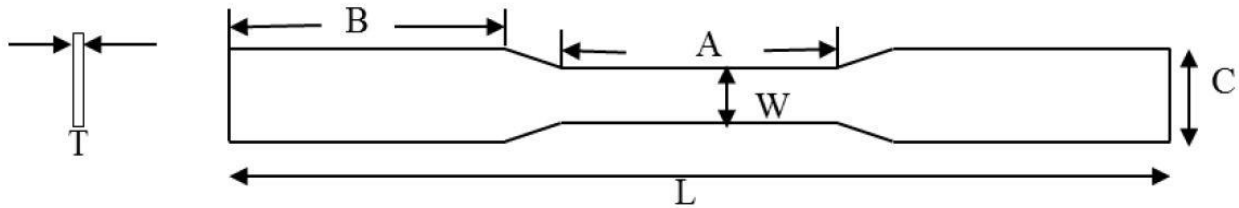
The geometry of tensile specimen, in accordance with ASTM E8/E8M-08
